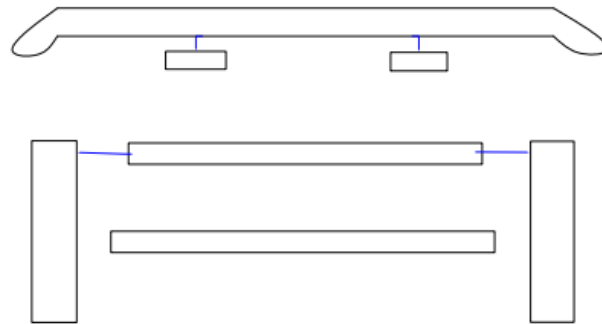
Exploded Front side view. (Made by Alice de Lescure)
